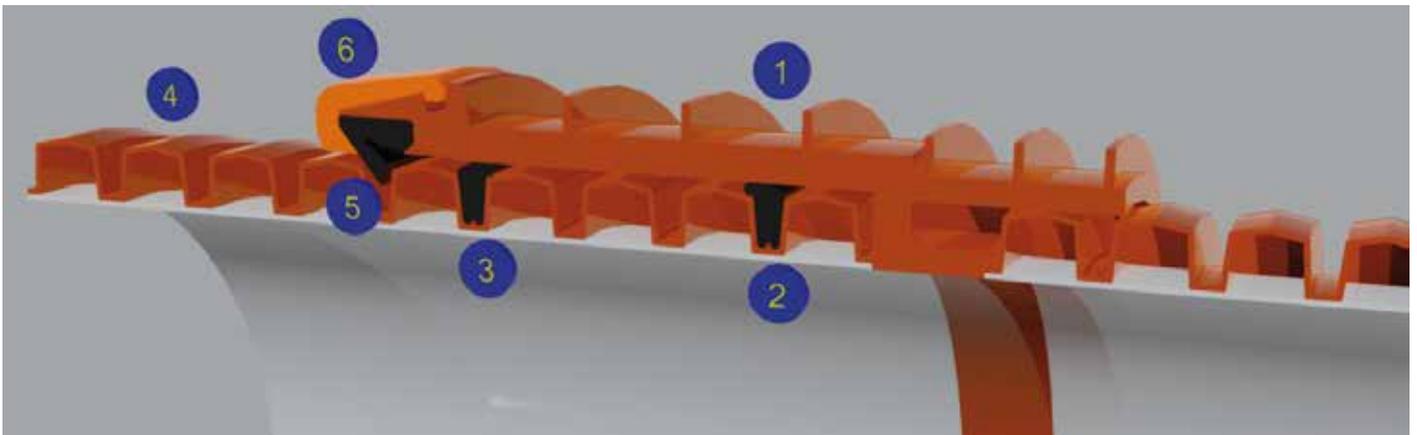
Pragma Locked Socket Connection – Detailed View
